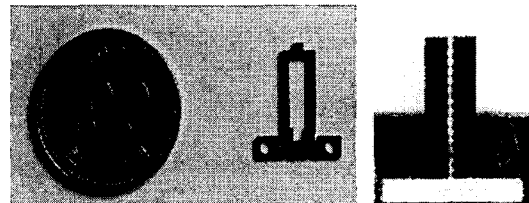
Elastic hinge mechanism and saw-shaped surfaces of microgripper fabricated by EDM
